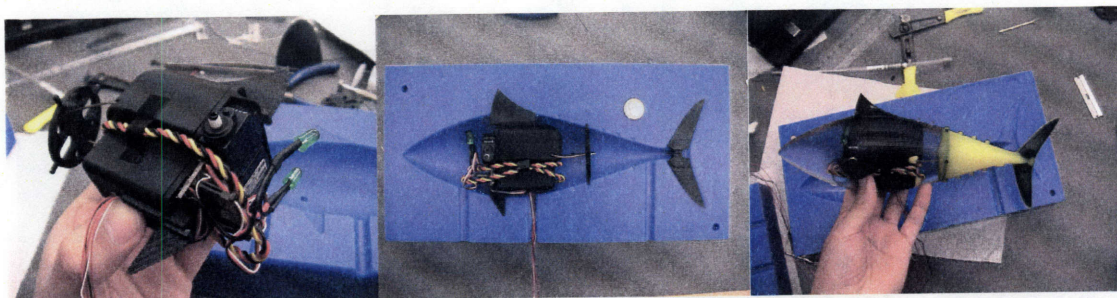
Tuna fabrication example: Actuation mechanism with cable transmission and individually controlled side fins is assembled using rapid prototyped parts (left). Hardware components are positioned inside mold (center). Finished prototype is taken out of mold after elastomer compounds are cured (right).
